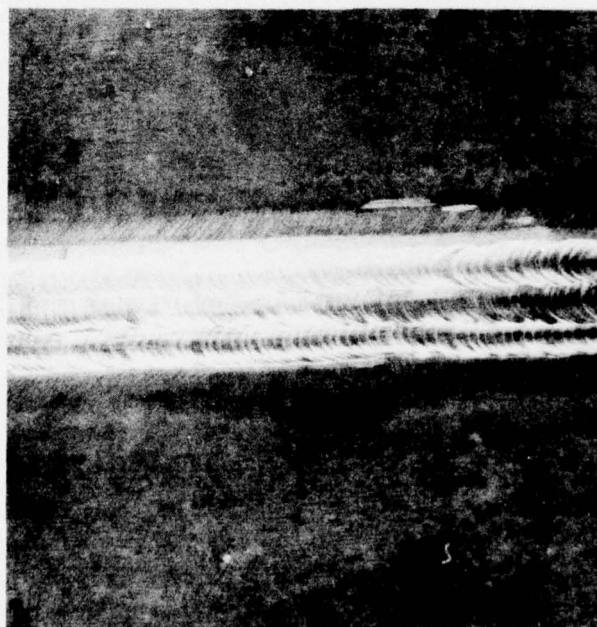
Special Copper Back Up Plate Used to Purge Back Side of Weld
